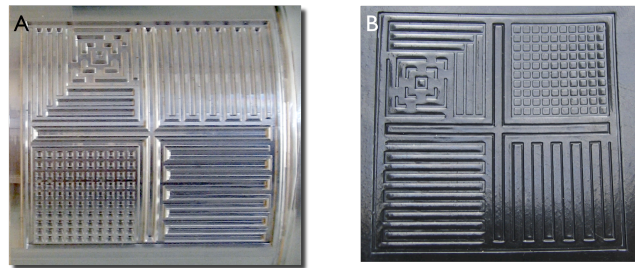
Machined roll (A); imprinted feature in PMMA (B)
